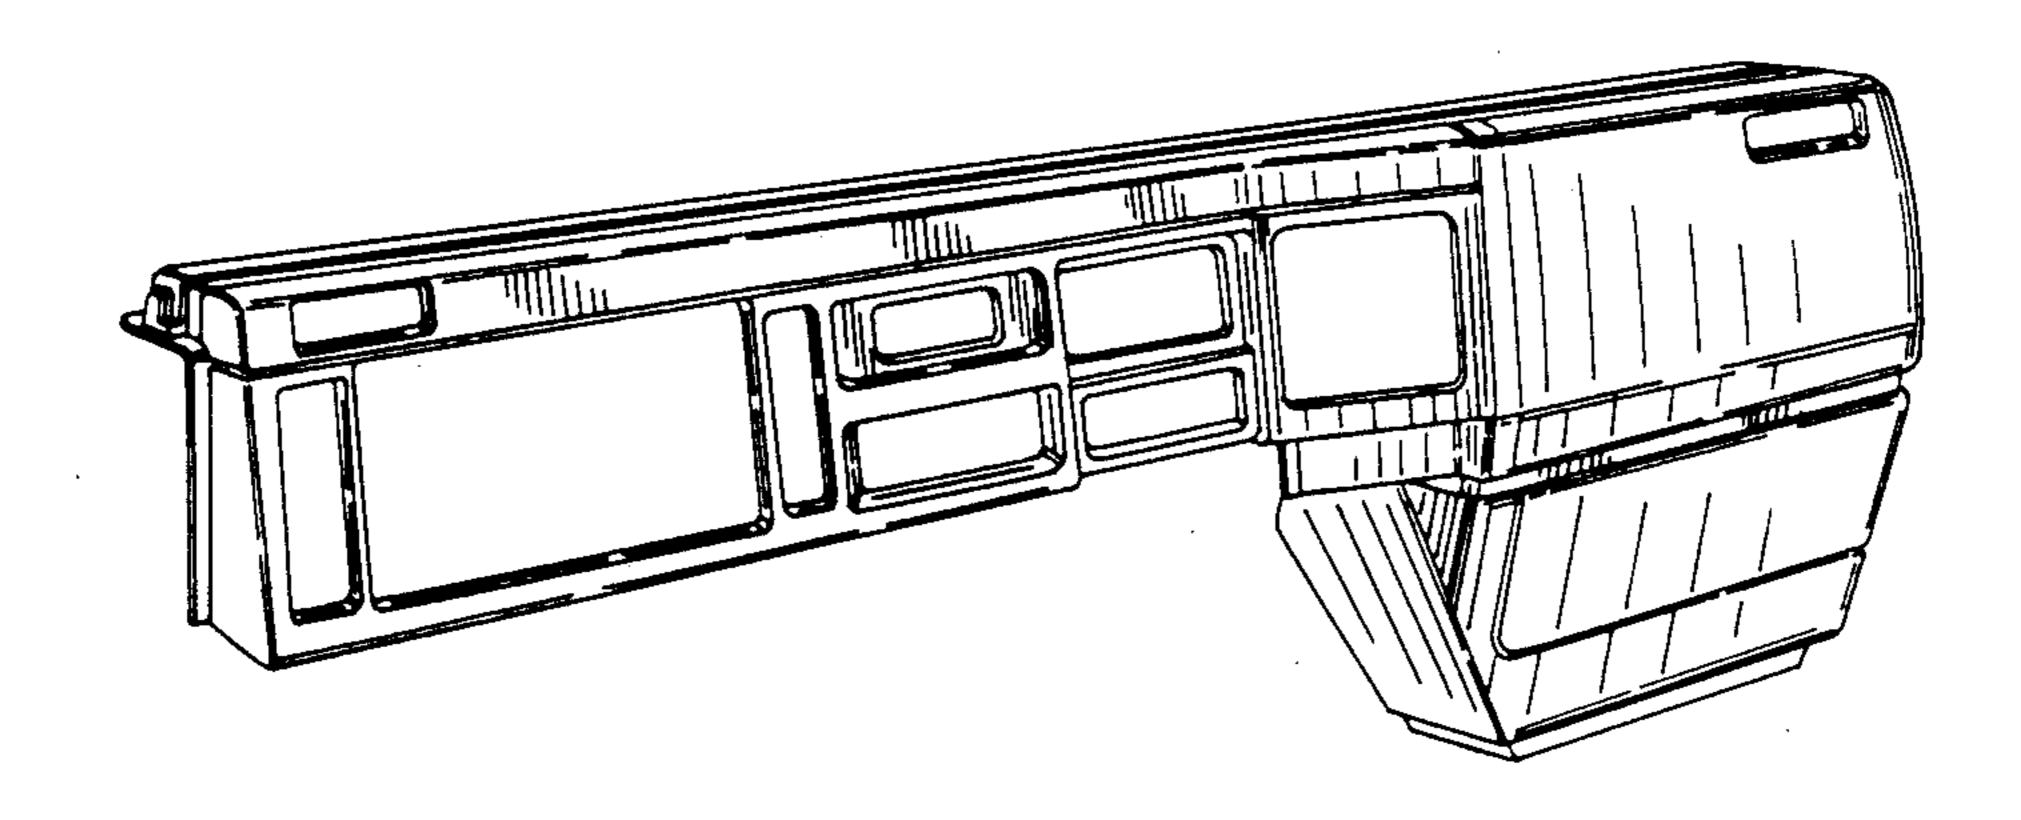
is a perspective view taken from the front and left side of the instrument panel embodying our new design;
